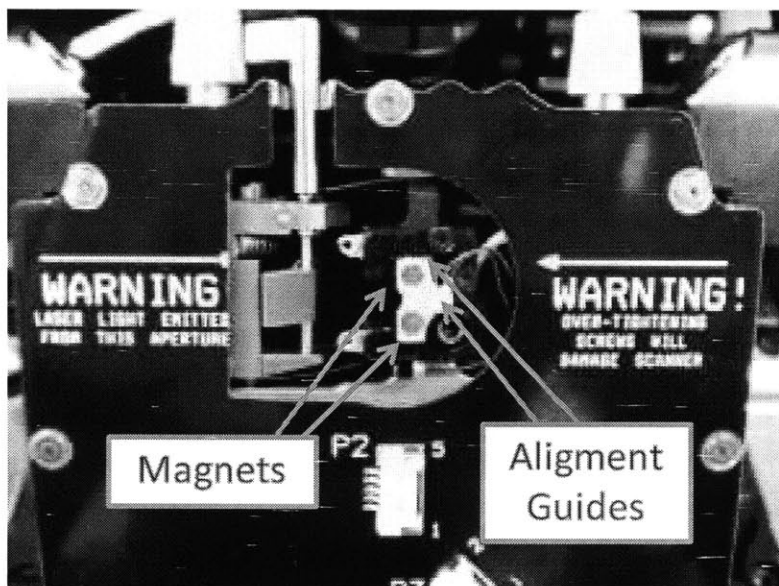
DPN 5000 scanner universal mount with magnets and alignment guides for mounting the tool
